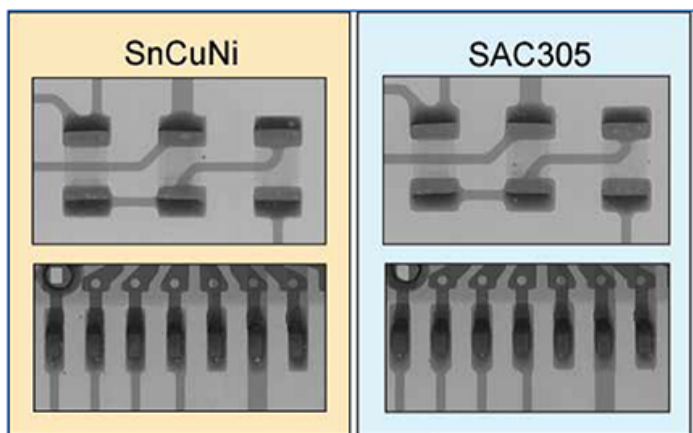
Photographs of SMT solder joints produced with a cool reflow profile. Both alloys showed good wetting and fillet formation
